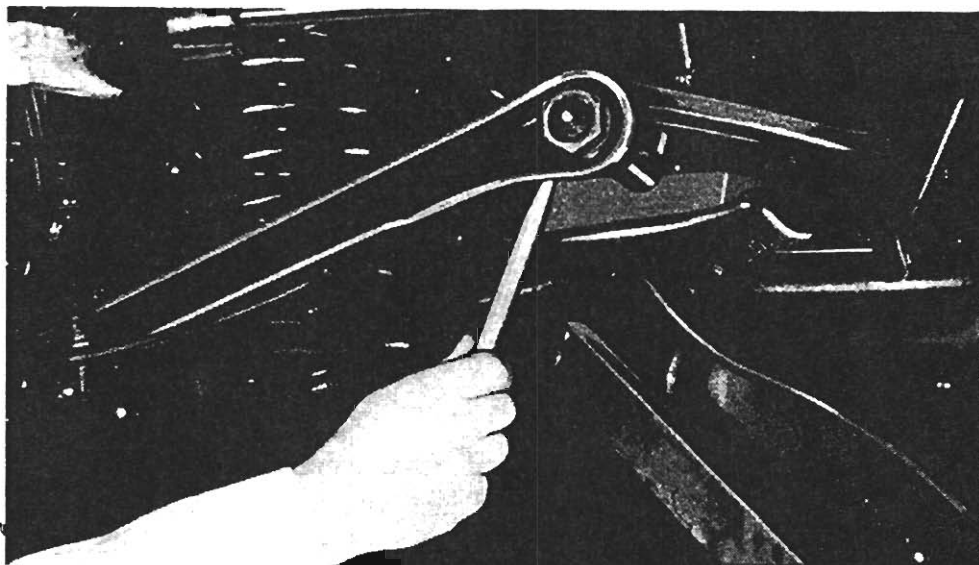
The Holes in the Bracket and in the Frame May Be Lined Up Using a Punch or Drift.
